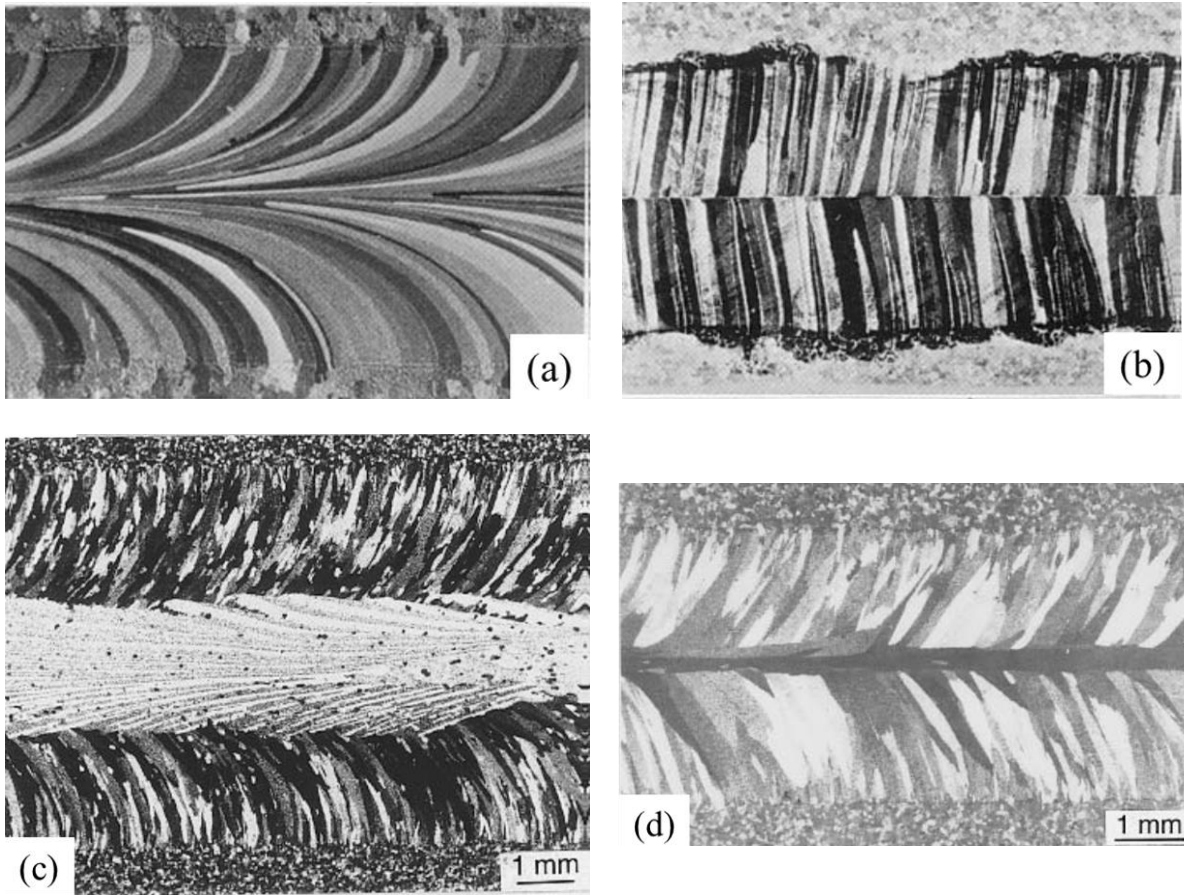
Grain structures in GTAW for (a) 99.96% aluminum at welding speed $4.17 \text{ mm}\cdot\text{s}^{-1}$ [Ara73], (b) 99.96% aluminum at welding speed $16.67 \text{ mm}\cdot\text{s}^{-1}$ [Kou03], (c) 5052 aluminum at welding speed $4.2 \text{ mm}\cdot\text{s}^{-1}$ [Kou03], and (d) 1100 aluminum at welding speed $12.7 \text{ mm}\cdot\text{s}^{-1}$ [Kou03].
